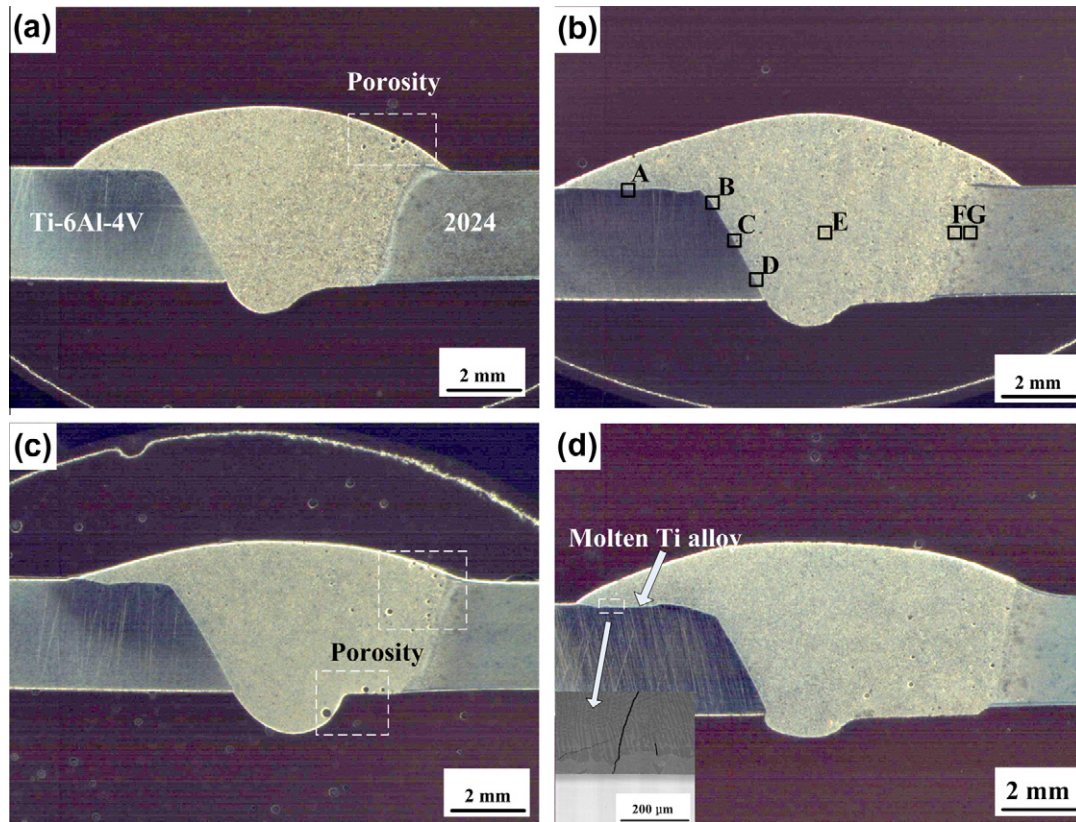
Macroscopic cross-section of Ti/Al GTA welding–brazing joints made with varying welding currents (a) 100 A, (b) 110 A, (c) 120 A and (d) 130 A.
